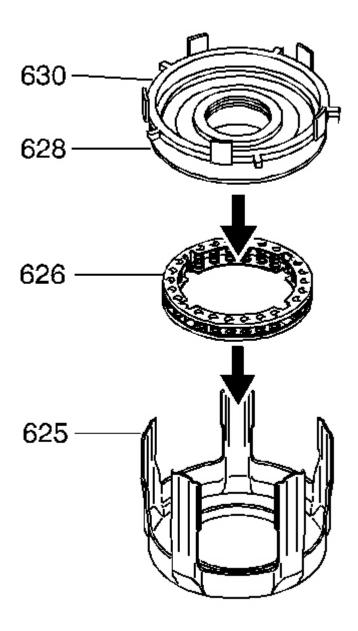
Locating 3rd & 4th Spring Assembly Courtesy of GENERAL MOTORS CORP.
